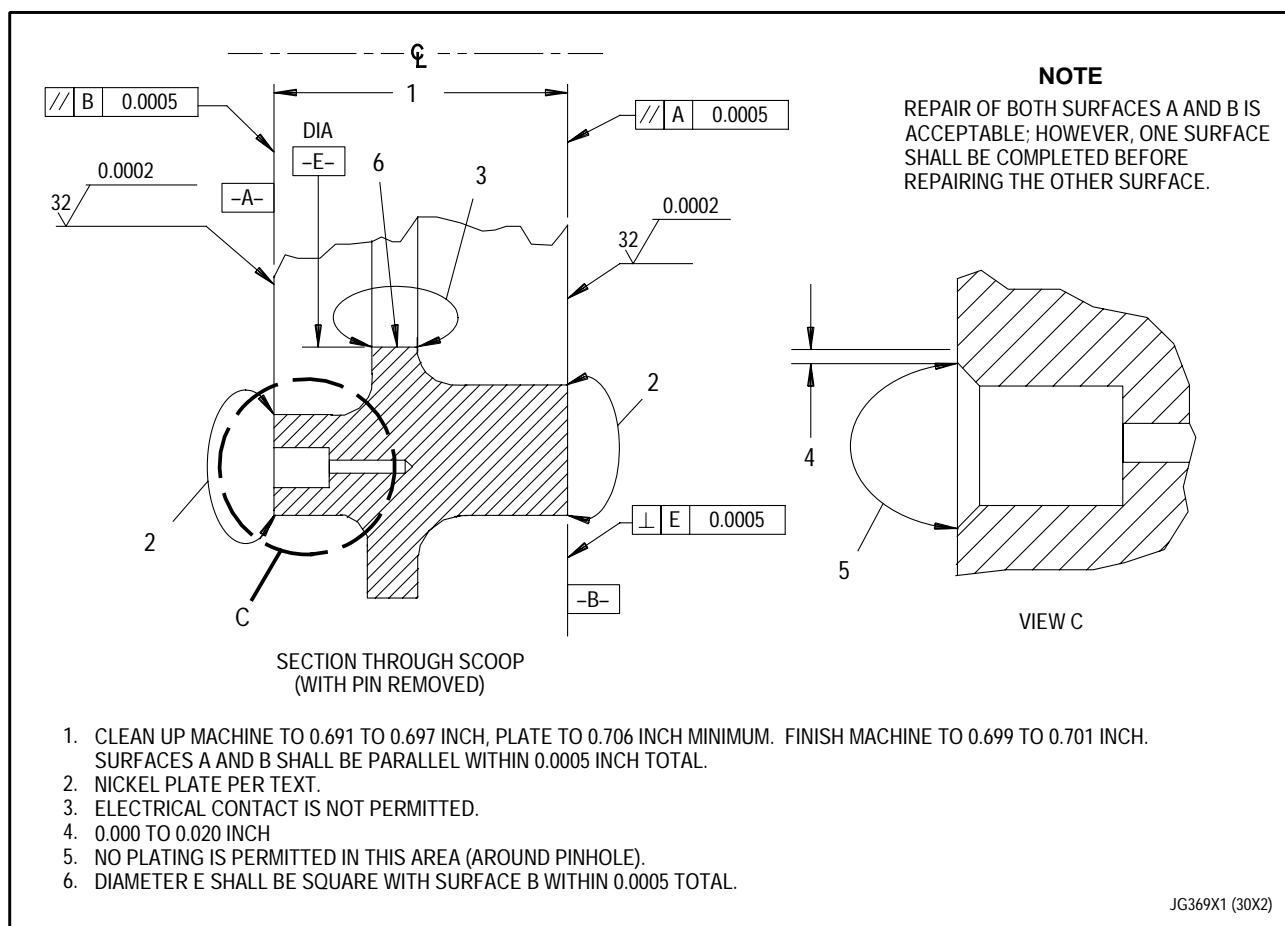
No. 2 Bearing Front Scoop Assembly - Plating Repair
